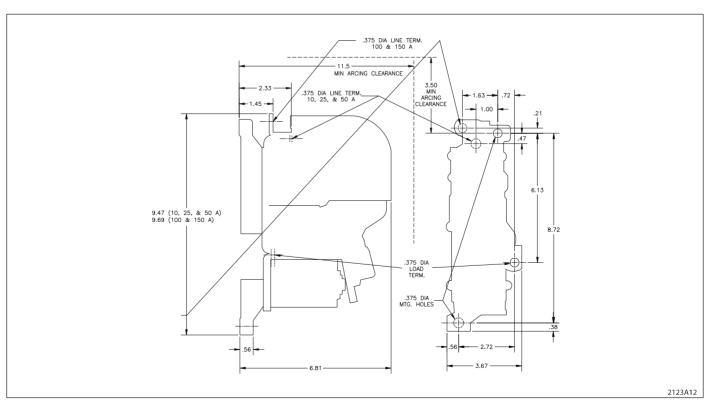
Dimension Drawing of 1NC Pole ME Contactor (dimensions in inches)
